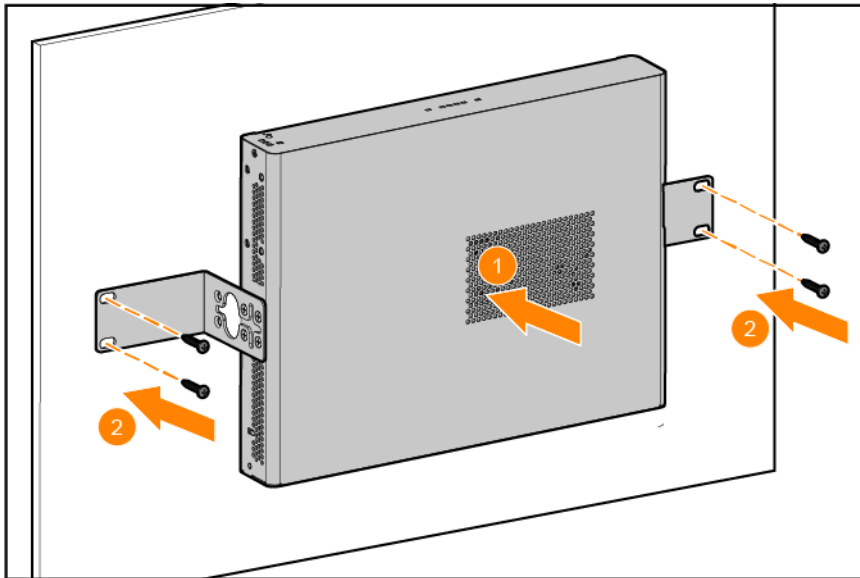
Mounting Gateway SG2505P to a wall with networking ports facing downward (toward floor)
